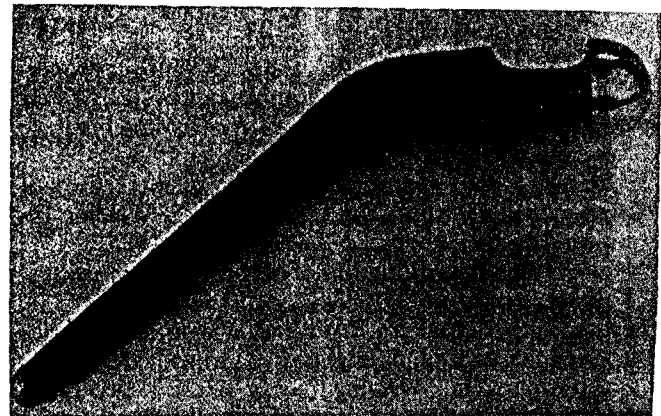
Hand Tools Inertia Welded From Forgings
